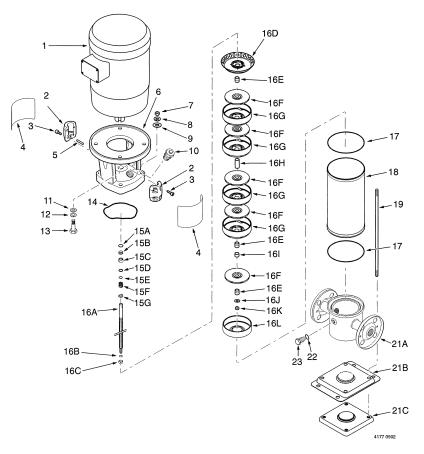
Exploded View 8m³ and 16m³ Cast Iron Models
